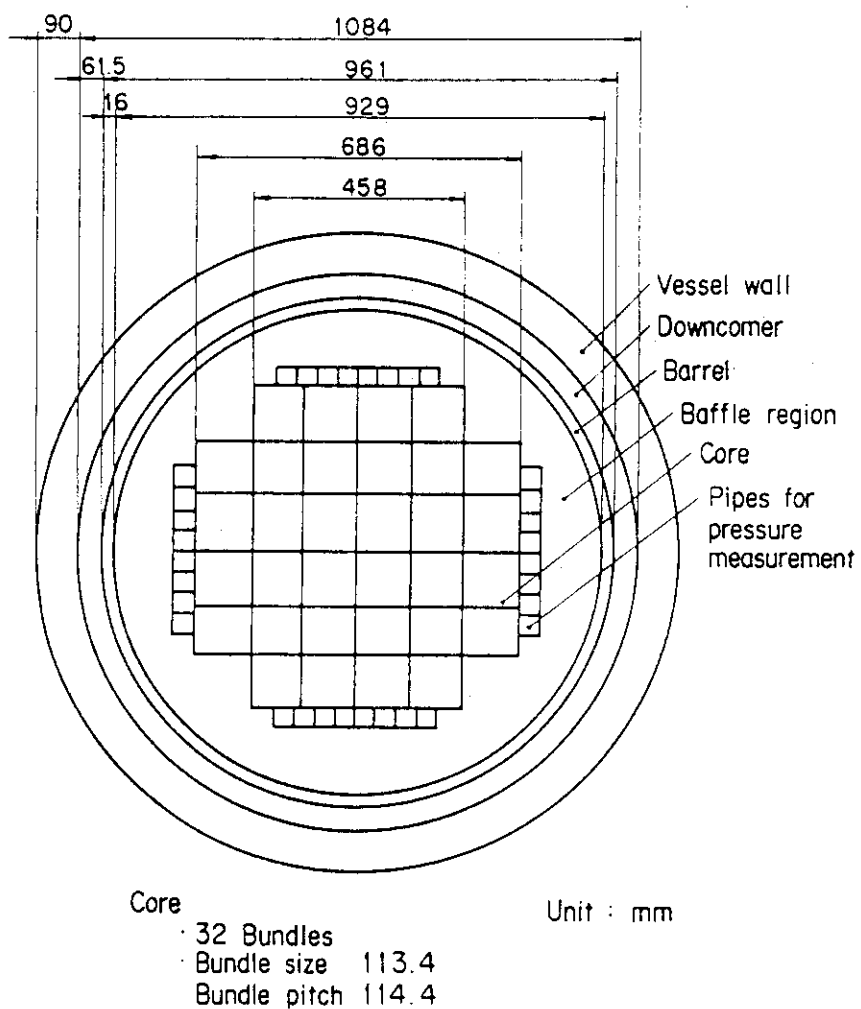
Dimension of CCTF Core-II pressure vessel cross section
